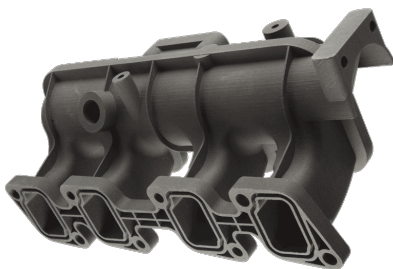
3D printed PA12 auto part via HP multi-jet fusion (Courtesy of Ford Motor Company).
